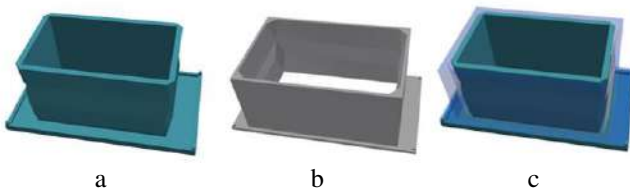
Origami-shaped crash box pattern mold: a – inner part; b – outer part; c – mold hilitically
